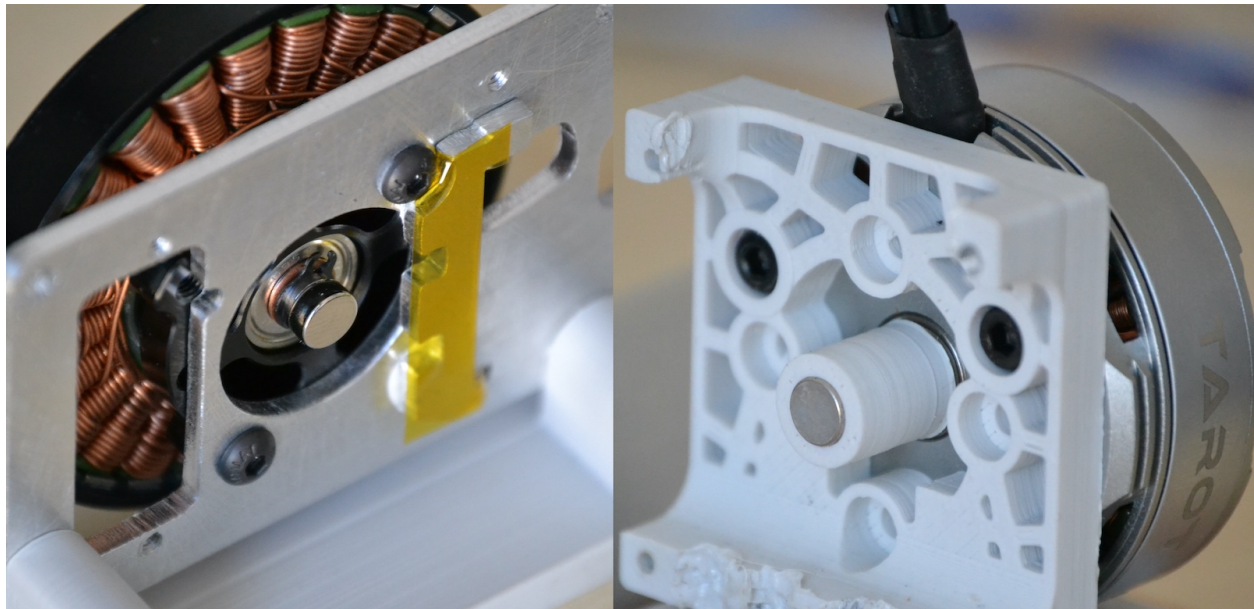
Left: Magnet mount directly on shaft. Right: Magnet mount using 3d-printed holder.
